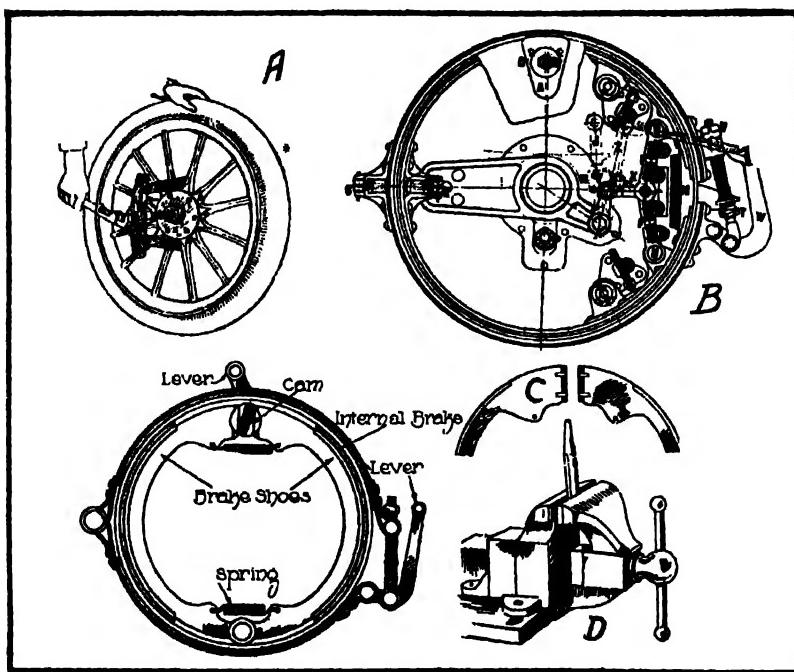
Hints on Adjusting Internal and External Brakes.
